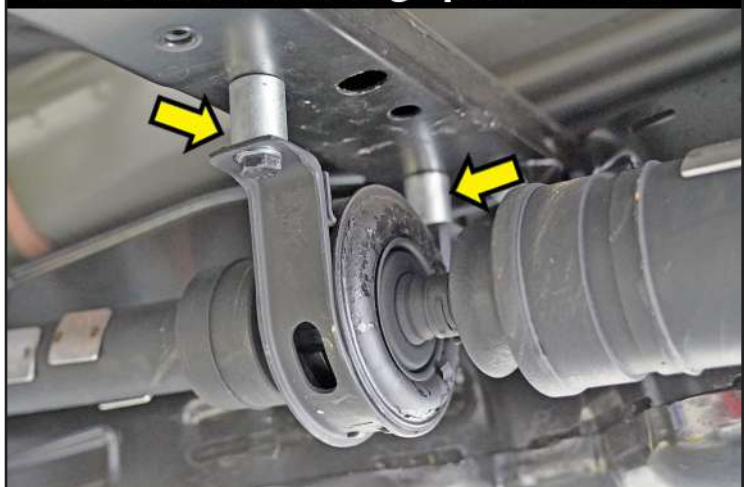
Reconnect Rear Track Bar...Driver Side45. INSTALL CARRIER BEARING SPACERS - JT...
